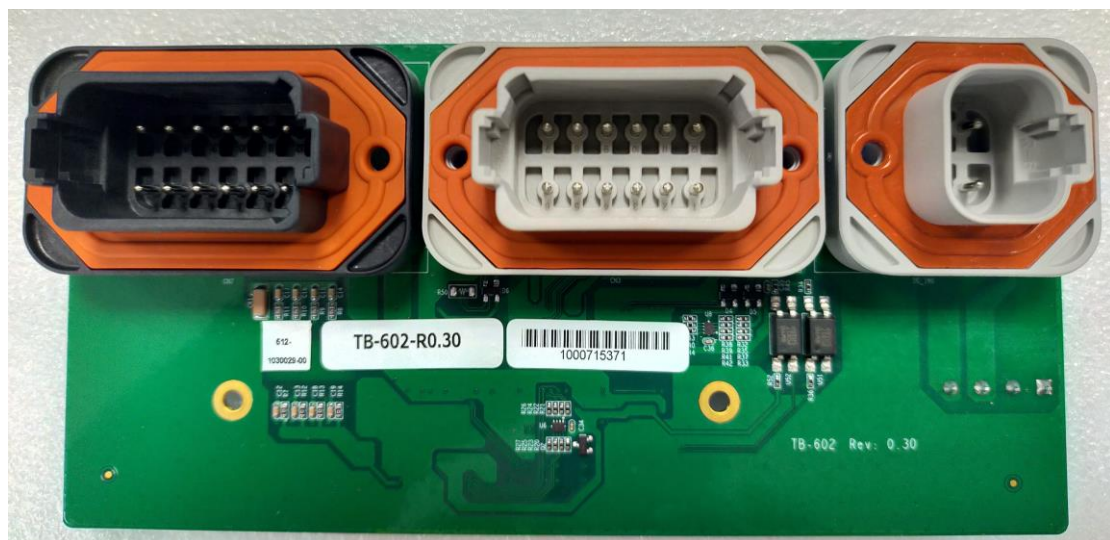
Jumpers and Connectors Location- Board Bottom
